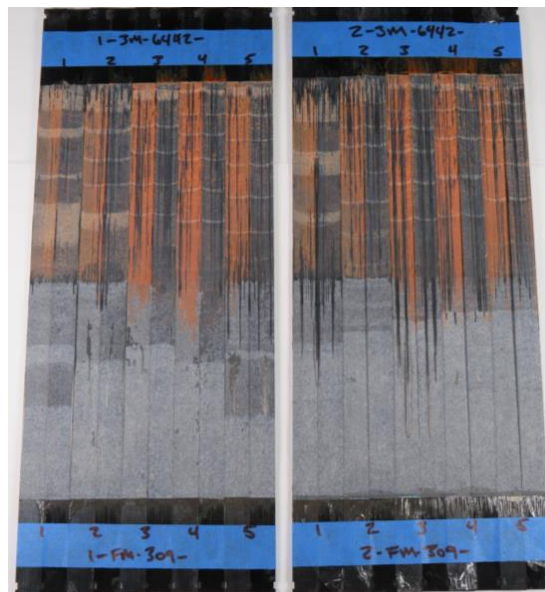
Fracture surfaces for two panels, previously laser treated, showing uniform cohesive failure mode. Panel 1 is left, Panel 2 is right (see Table 1 for details).
